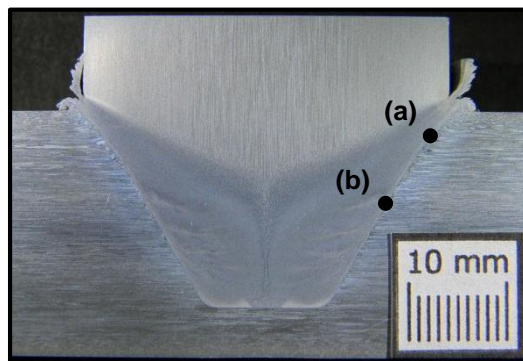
Weld FM-16 Macrograph showing the location of point (a) and (b)
